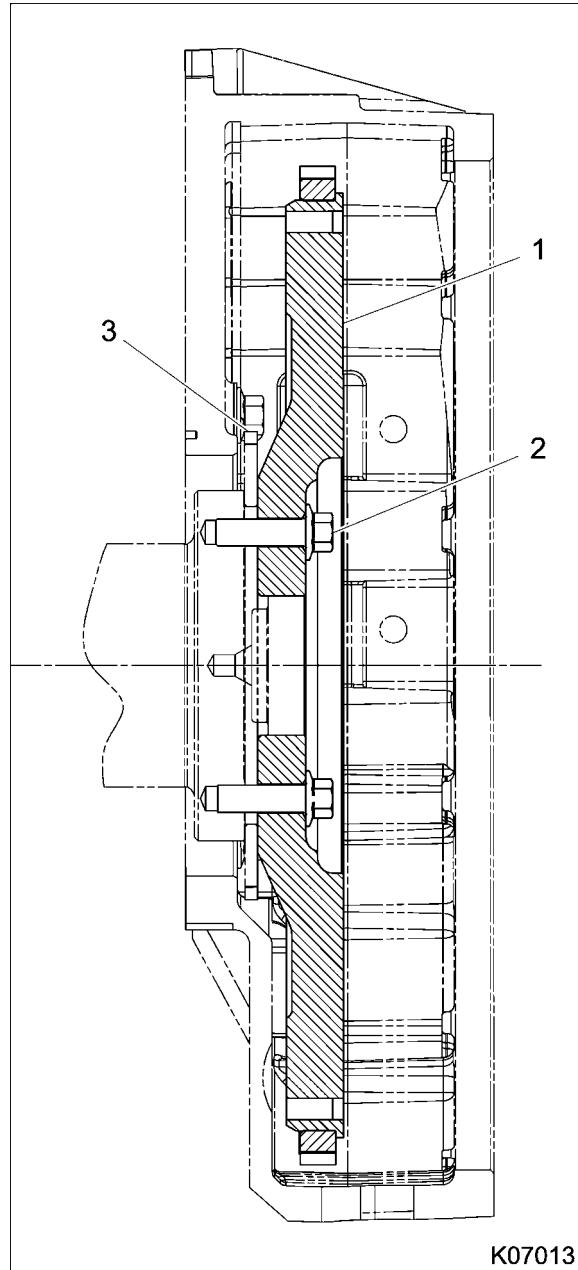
14 inch flywheel - for multiple plate clutch applications (800 lbf·ft and below)
